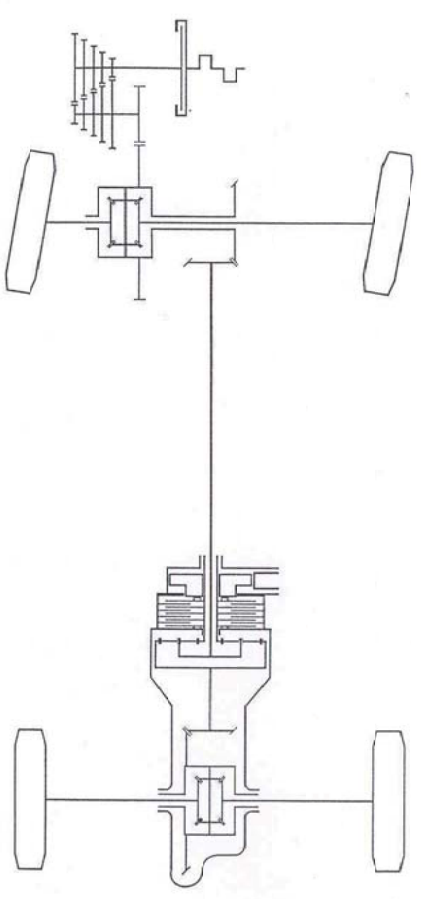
Drive line of the SFT-PROMETHEUS-prototype
